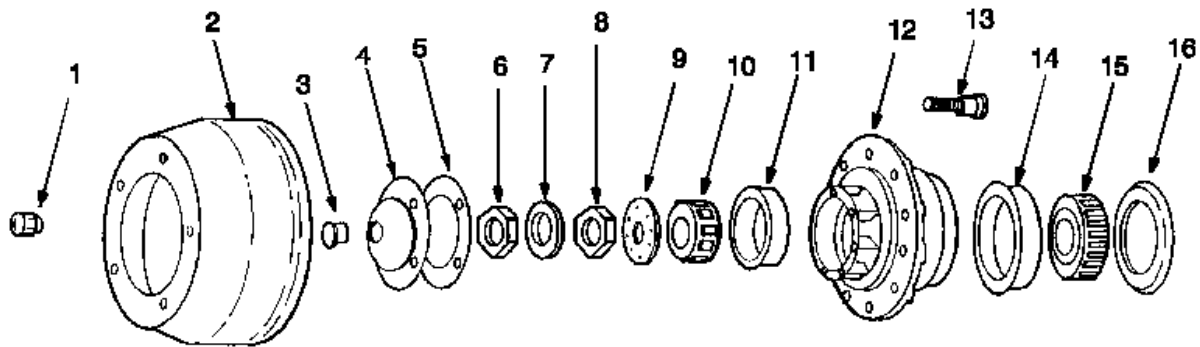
Exploded View of Typical Disc Type Front Hub Assembly with Outboard Mounted Brake Drum
